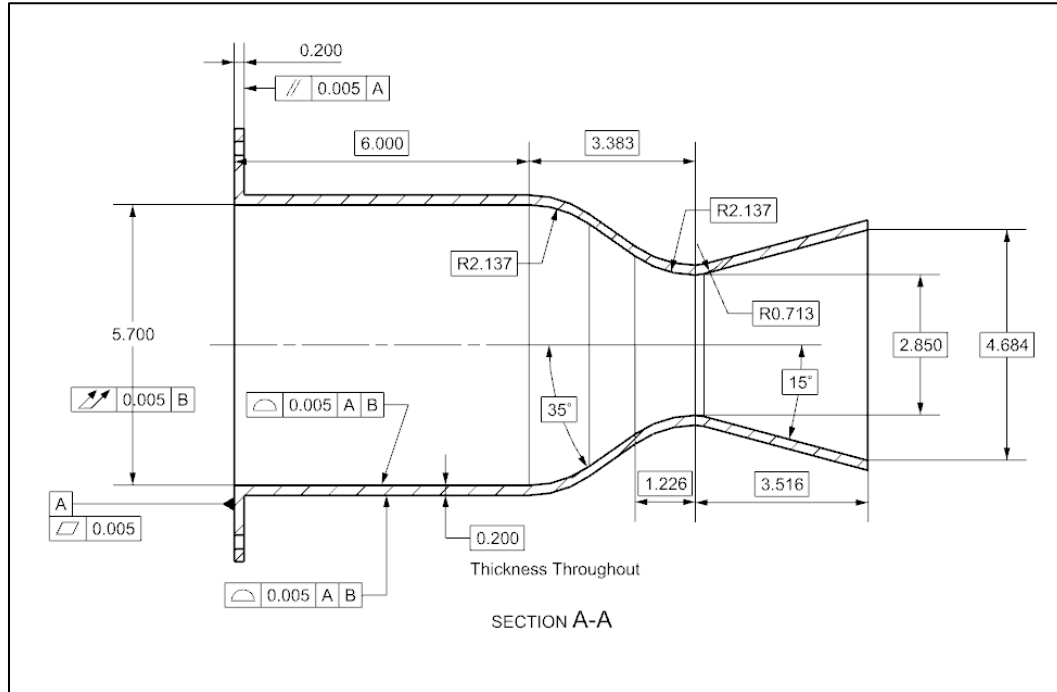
Dimensions of the Combustion Chamber and Nozzle
